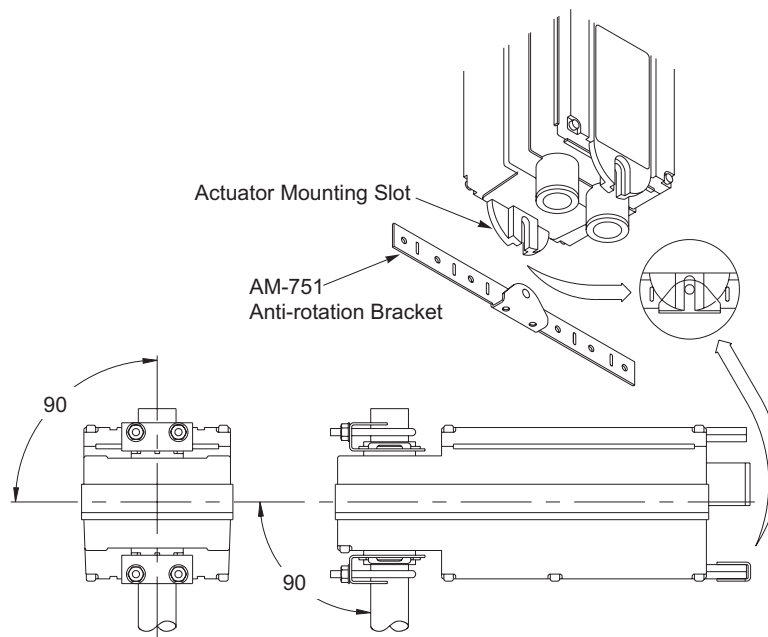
Mounting Anti-rotation Bracket to Actuator.
